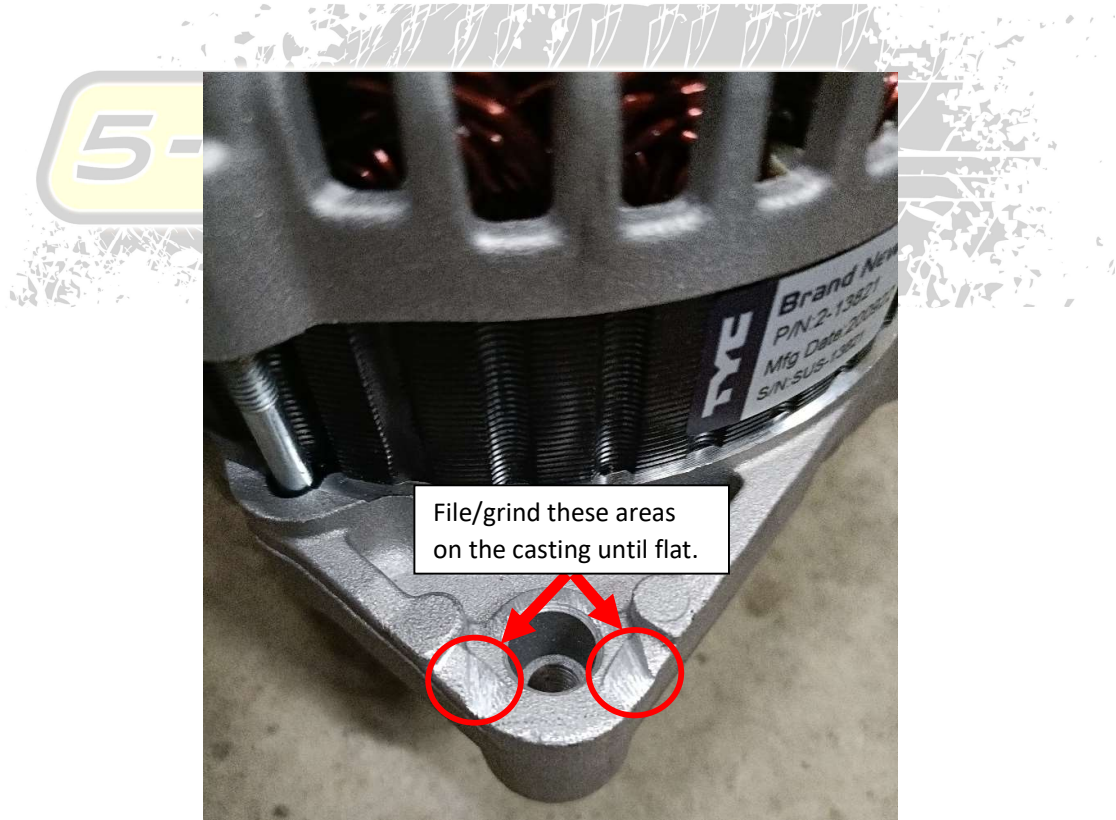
Flatten the casting tab from the alternator top mounting lug backside
